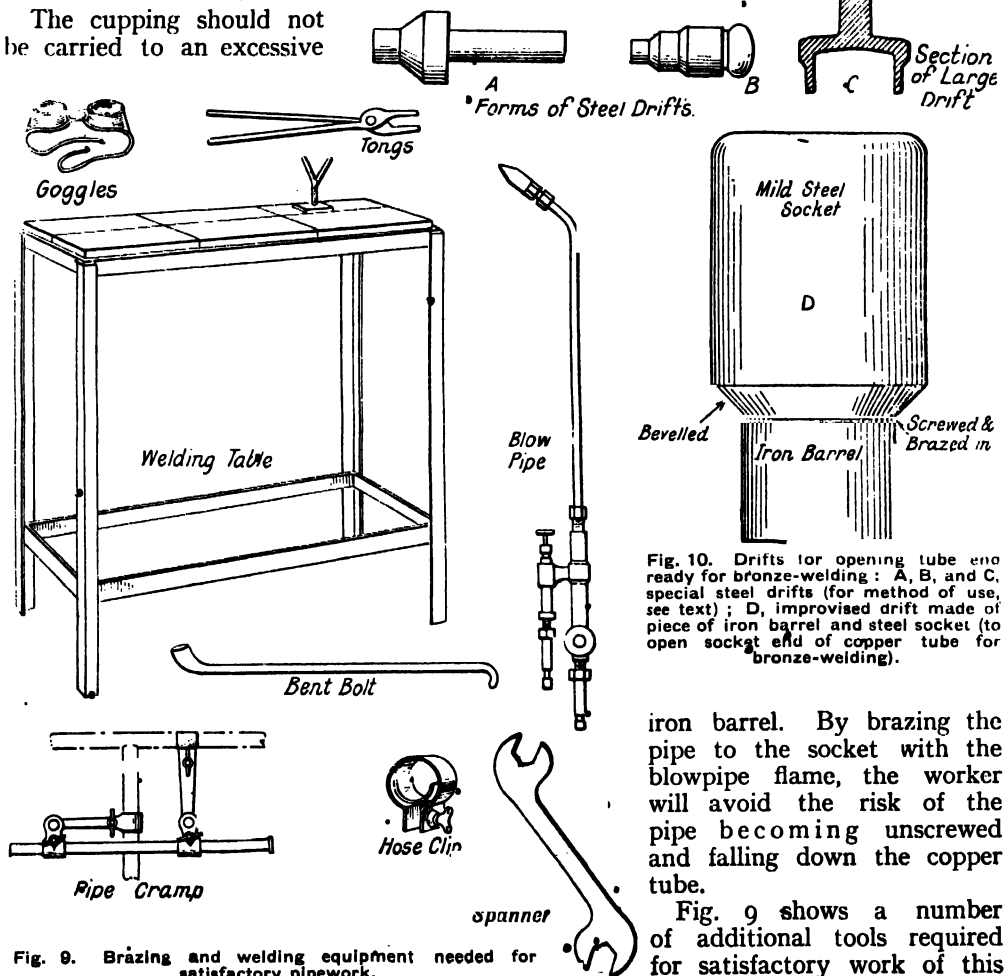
Drifts for opening tube end ready for bronze-welding: A, B, and C, special steel drifts (for method of use, see text); D, improvised drift made of piece of iron barrel and steel socket (to open socket end of copper tube for bronze-welding).
